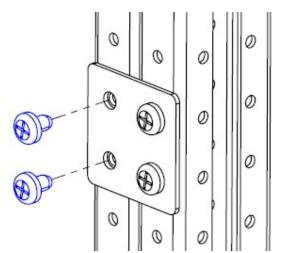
Additional sidecar cabinet mounting plate & screws
